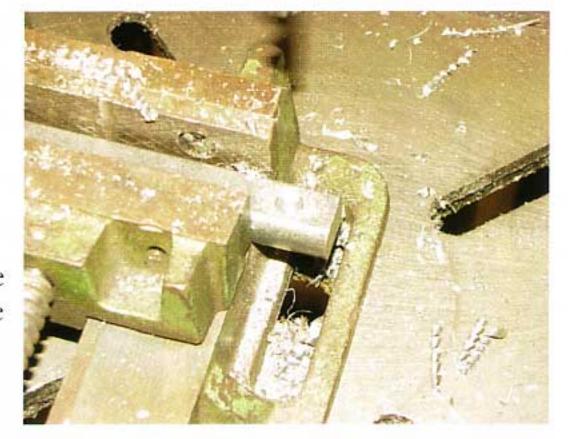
There is a notch in the input shaft of the rack and pinion. One of the set screws from the lower U-joint needs to seat into this notch. This will positively locate the lower U-joint and will prevent the input
